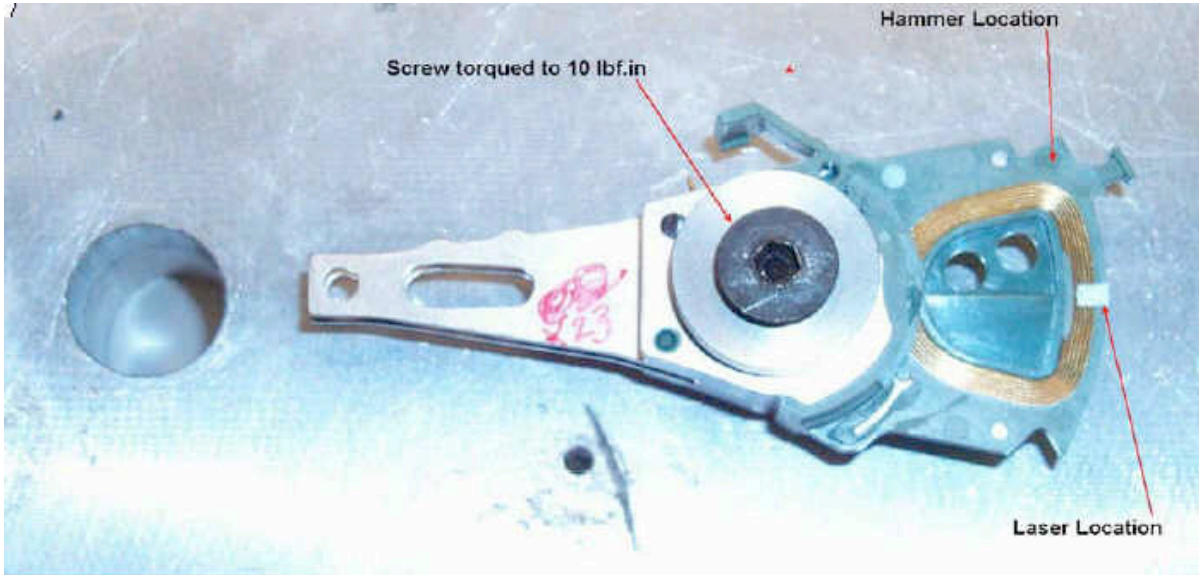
Sample VCM part clamped into the LDVM test fixture.
